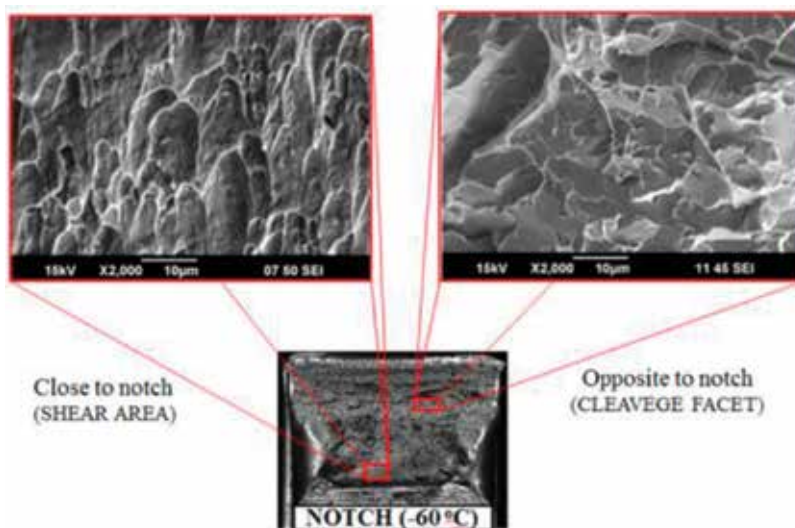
Fracture surface for 10-mm thick CVN specimen tested at -60°C .
